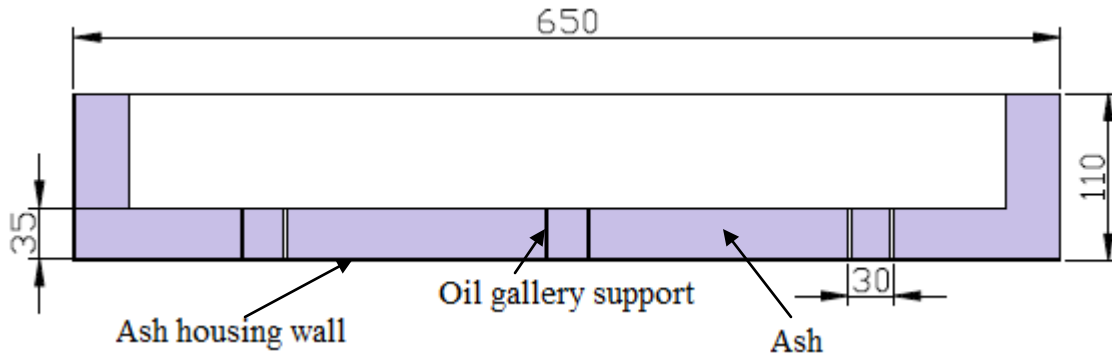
Ash housing wall showing Ash and oil gallery stand.
